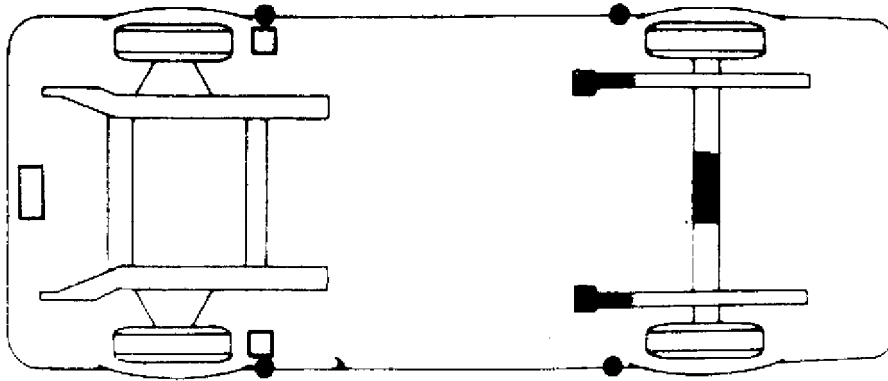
Floor Jack, Floor Hoist & Vehicle Jack
